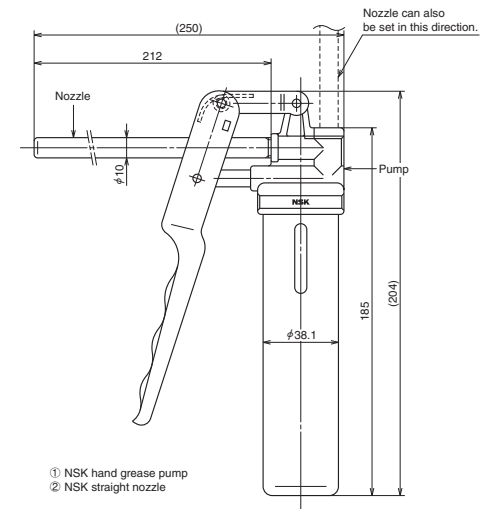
NSK Hand Grease Pump with NSK straight nozzle
